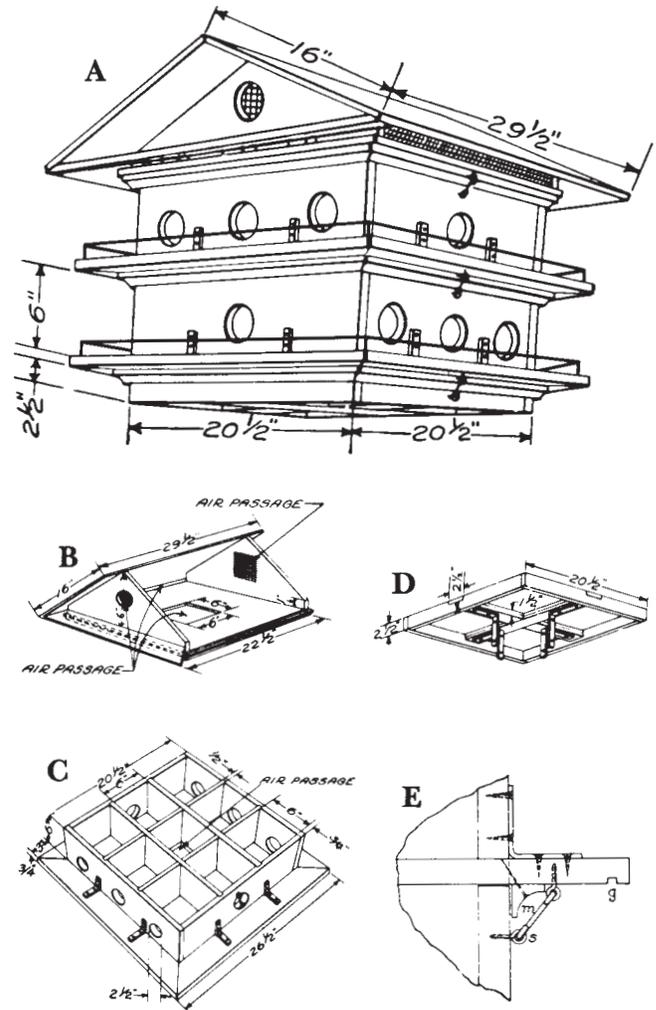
A, The completed martin house; B, Details of attic designed for ventilation; C, Floor plan for each level of the house. Remove floor from center chamber. D, Foundation - note double thickness of central cross (3/4" stock); E, Detail of porch. Note rain groove (g).
